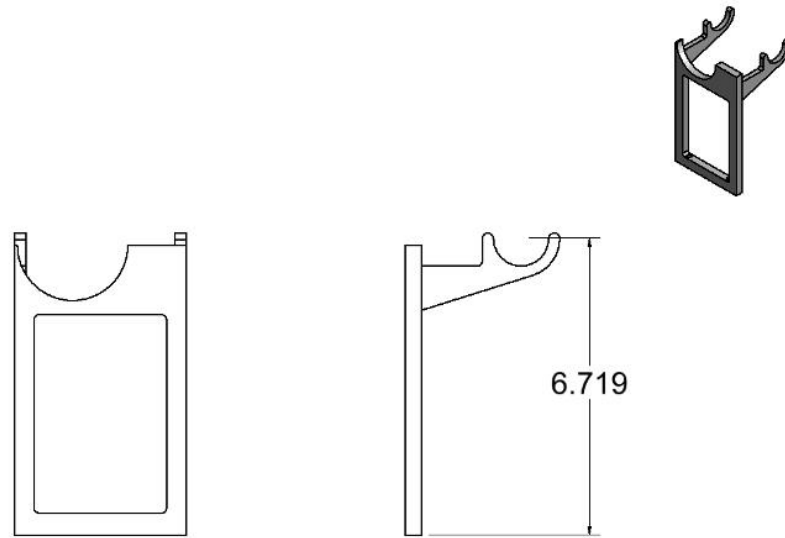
Mechanical drawing of support weldment (Support Stand Items 3 and 4)
